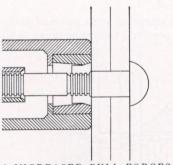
Hi-Shear type rivet has collar formed into head which locks around shaped shank of cadmium-plated steel to provide a solid rivet stronger than usual rivets.
